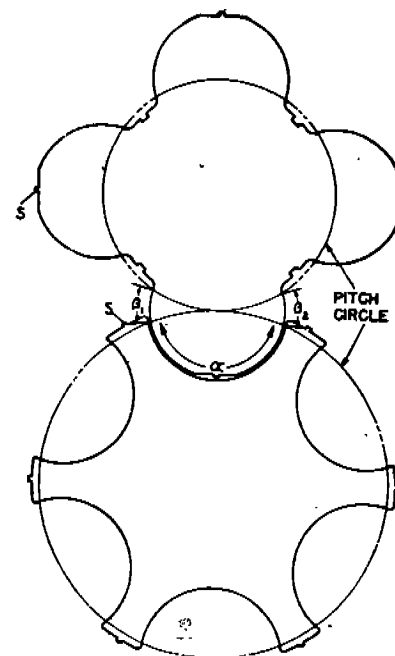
Rotor profiles of the 4-lobe male and the 6-lobe female. The "built-in" clearance exists between the two rotors, courtesy of Fairbanks Morse, of the Colt Industries
